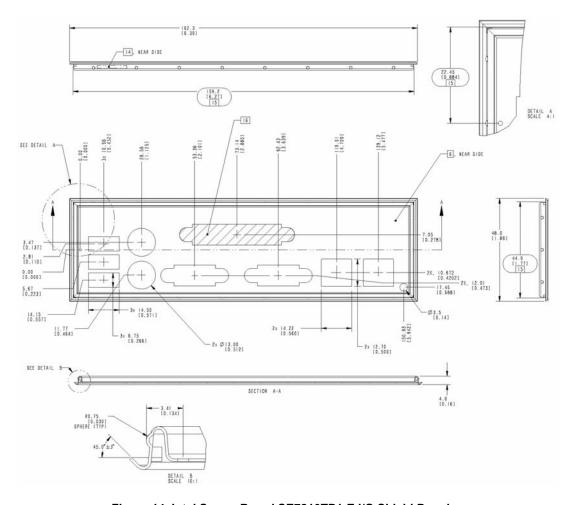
Intel Server Board SE7210TP1-E I/O Shield Drawing
